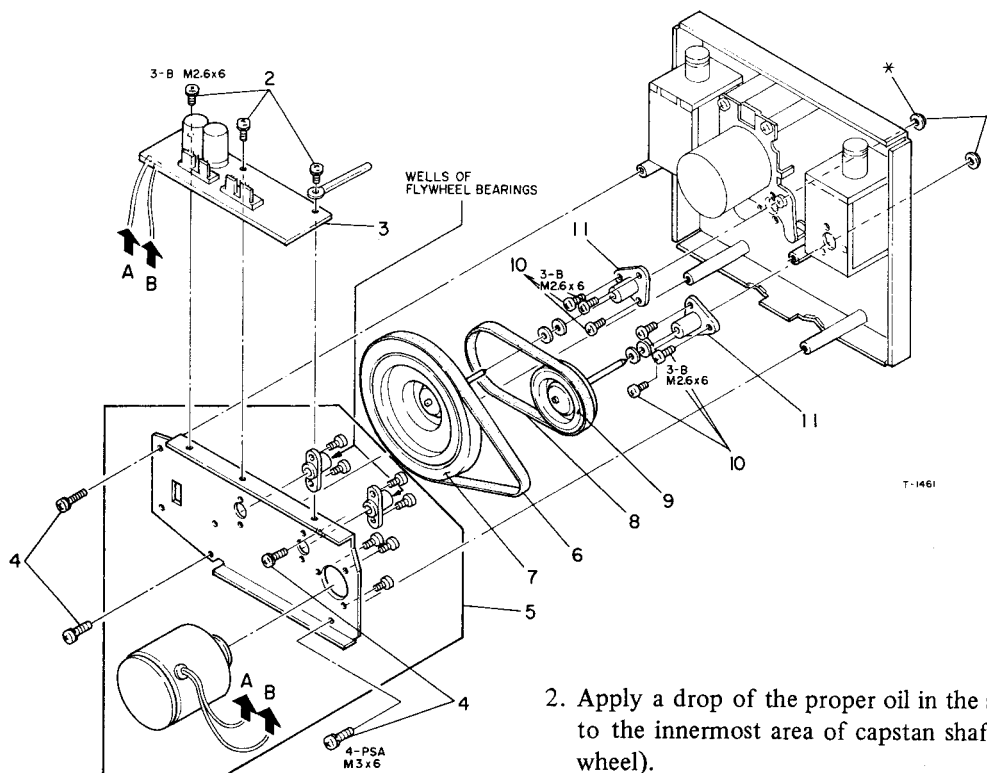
Capstan Motor and Capstan Drive Ass'y
